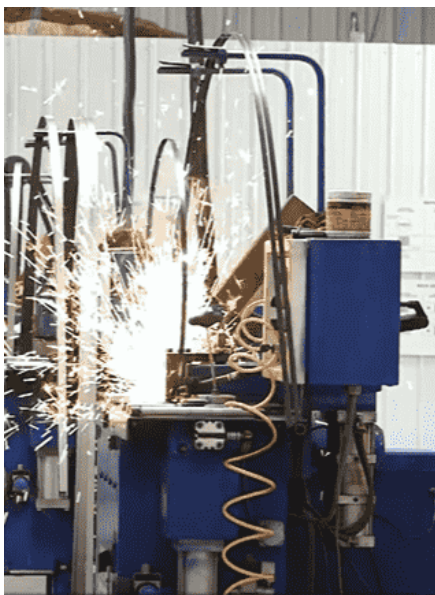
BAS 330 resistance welding machine from Ideal Werk, Germany
